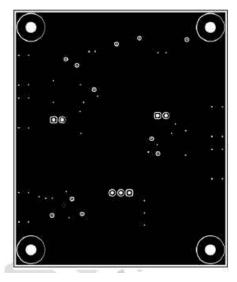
PCB Layout Example From LMK6 EVM - GND Layer 1
